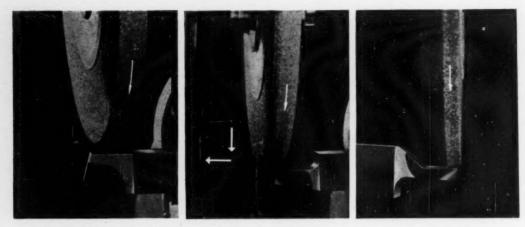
(left) The Tool is Set in a Vice at the Required Clearance Angles. Fig. 15. (centre) The Radius is Finished with a Formed Wheel. Fig. 16. (right) The Chamfer is Ground with a Formed Wheel
